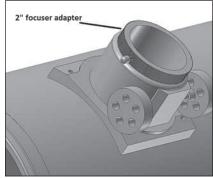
Remove the 2" focuser adapter and thread adapter #1 to get T-threads.
